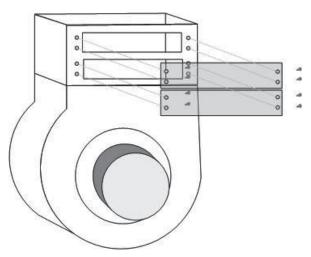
Showing Collar mounted on blower housing, element location and collar plate(s)
